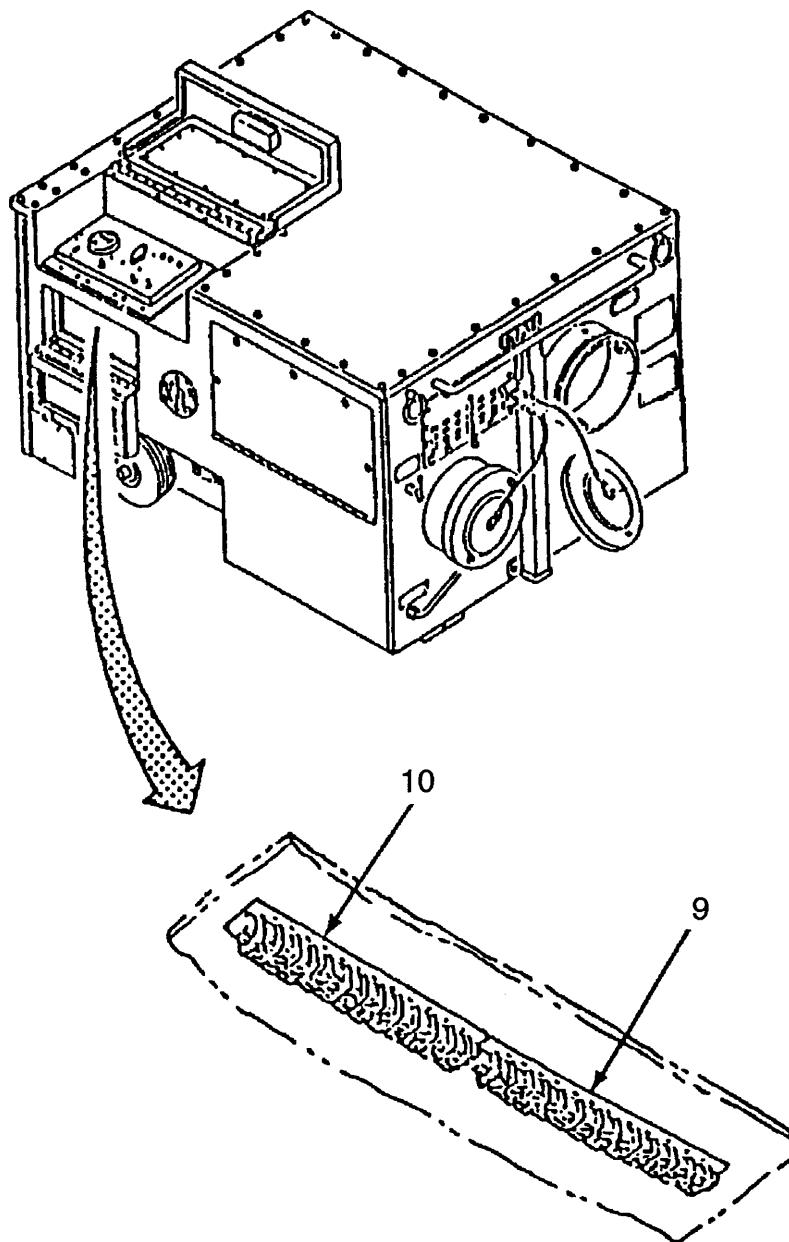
Control Box Assembly Terminal Boards/Transformer (Sheet 2 of 3)
